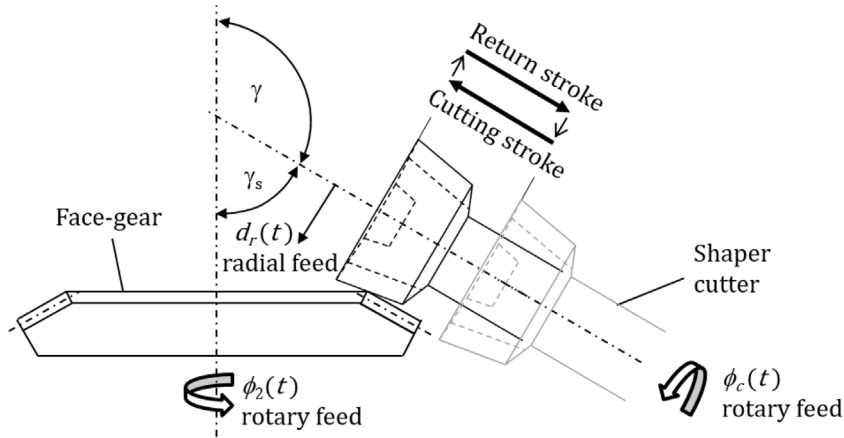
Gear shaping of a face-gear: Geometry and kinematics.
